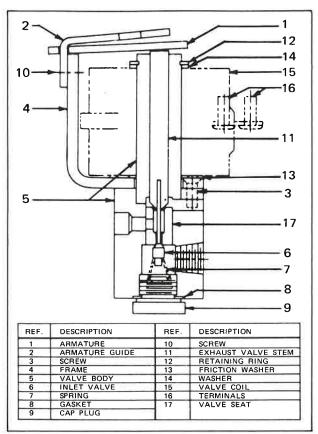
SECTIONAL VIEW OF MAGNET VALVE.
